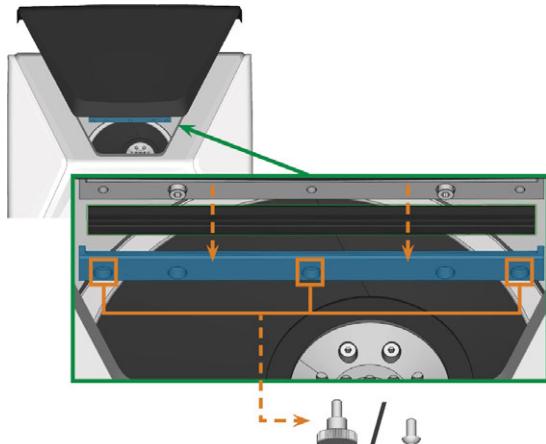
REMOVING THE VIEW WINDOW WIPER FROM THE MACHINE
